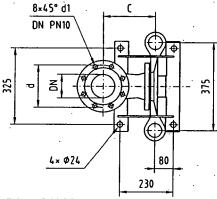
DN 80 and DN 80/100 guide rail system installation dimensions. The variable dimensions are given in table 5.3
